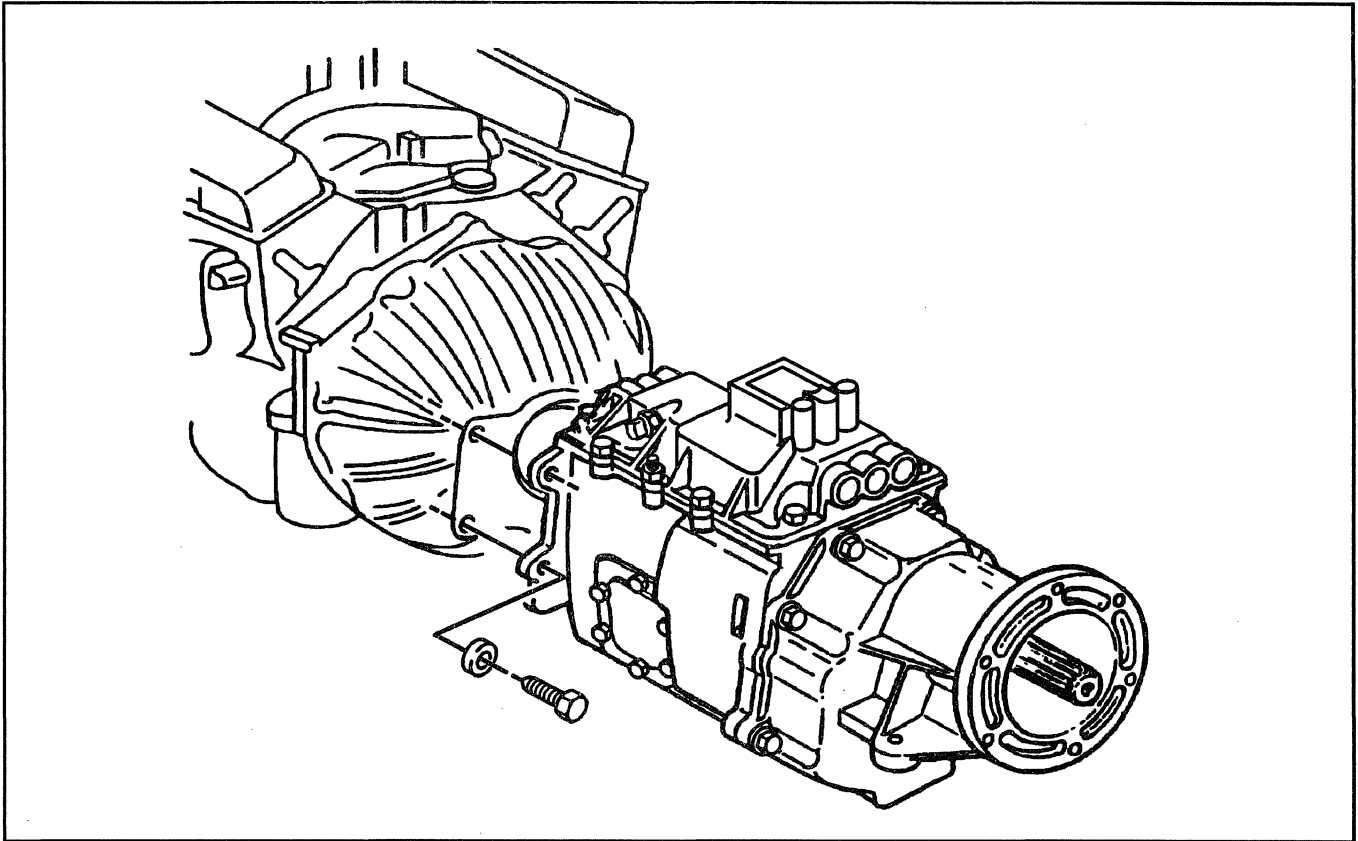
Transmission to Clutch Housing (New Venture Gear 4500) - 4WD Models
